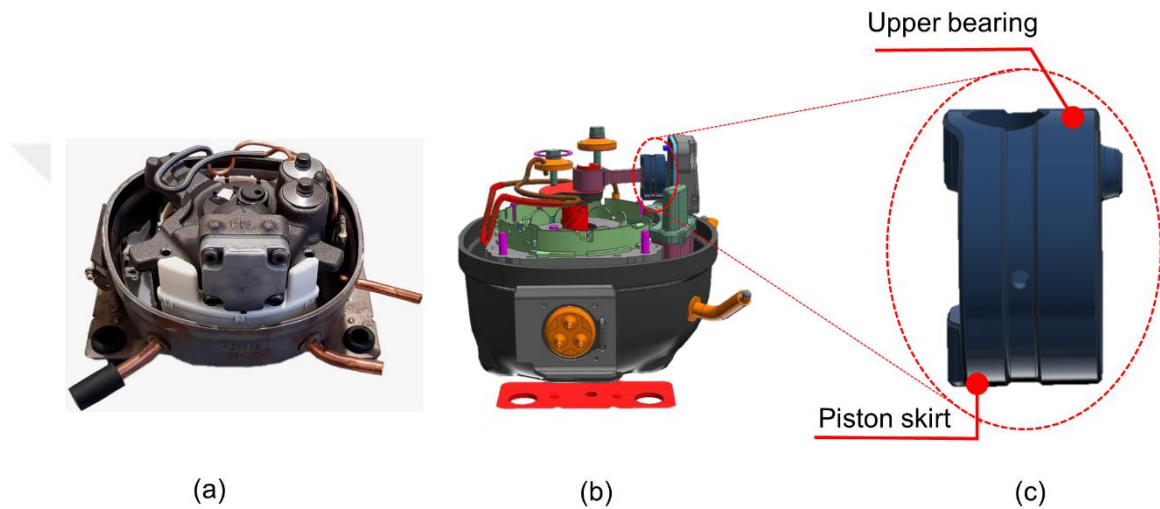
a) Image of inverter-type hermetic reciprocating compressor (b) CAD model (c) Piston
